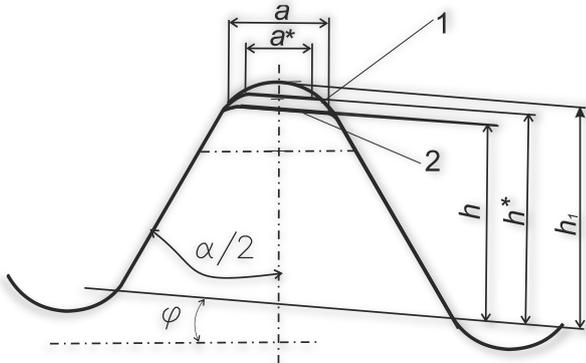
Scheme illustrating the technology of reducing the cross-sectional dimensions of the screw gap
